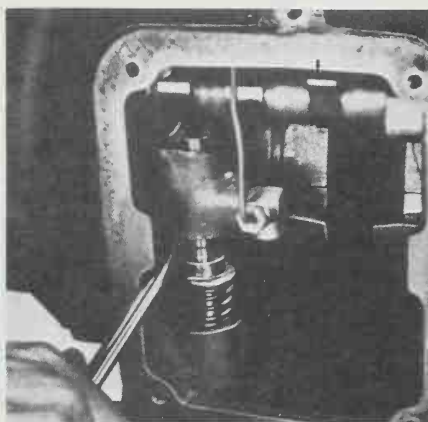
To remove camshaft, set oil pump to bottom of its travel and depress pump return spring until pump push rod is below level of camshaft bushings.
